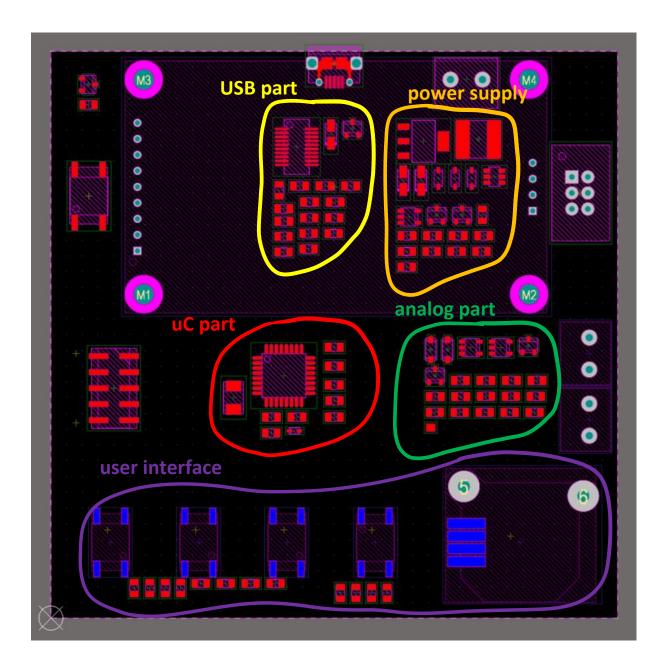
an example of the initial component placement for a simpler project. Using the "TOL shortcut" you can easily group and arrange module components on the PCB and therefore divide the PCB into segments.
